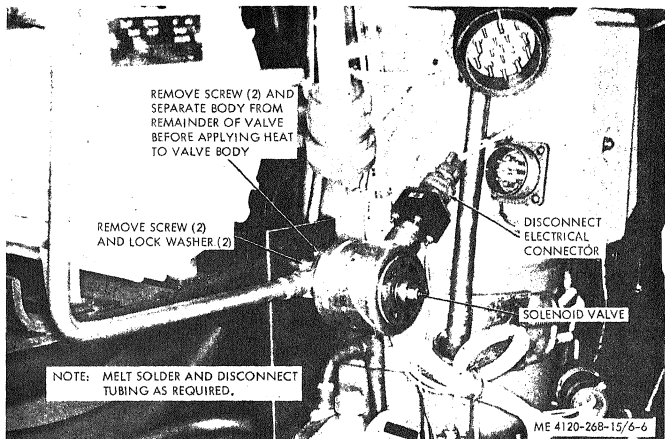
Pressure equalizer solenoid valve, removal and installation.
